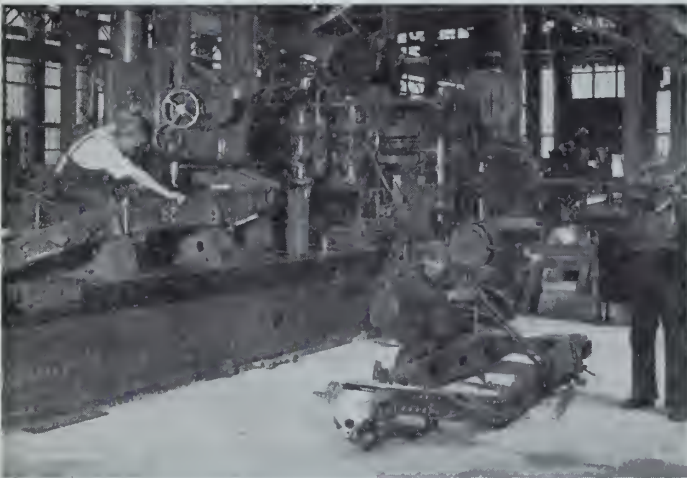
Machining fabricated under-carriage on a giant multiple milling machine which makes eight cuts in one operation.
